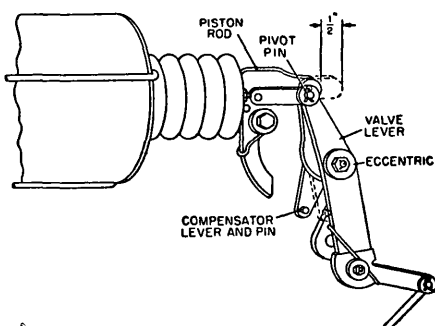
Clutch vacuum cylinder piston travel, 1948-51
